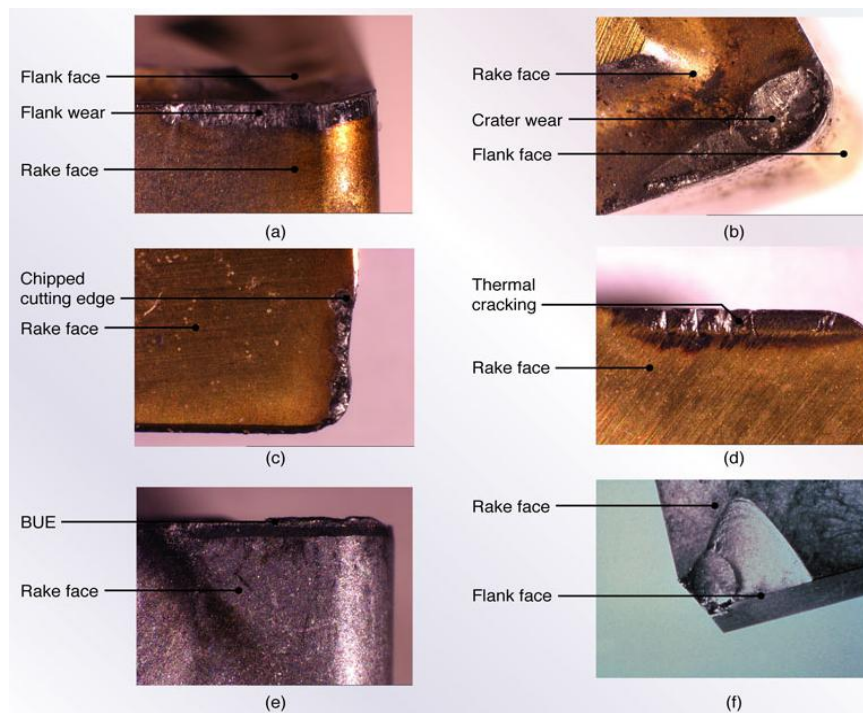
Types of wear on a turning tool: (a) flank wear; (b) crater wear; (c) chipped cutting edge; (d) thermal cracking on rake face; (e) built-up edge; (f) catastrophic failure. *Source:* Courtesy of Kennametal, Inc.
